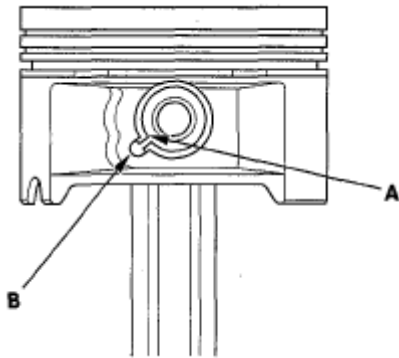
Identifying Piston Pin Snap Rings And Piston Pin Bores
